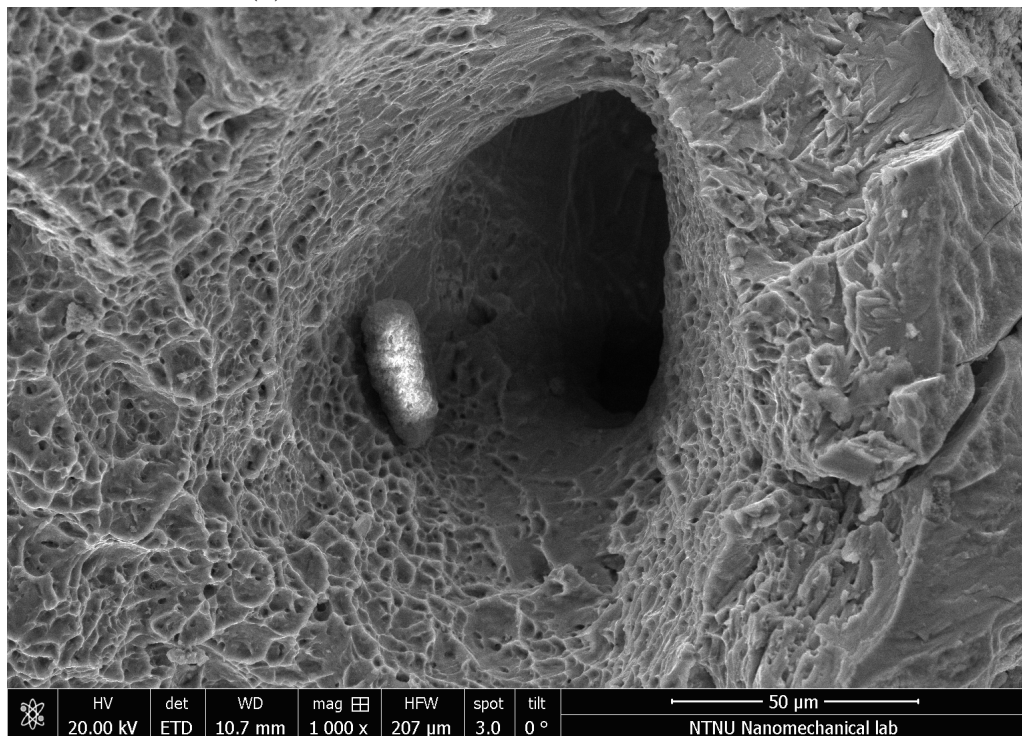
SEM of a spherical pore on the fracture surface of the machined 0° Charpy specimen.
